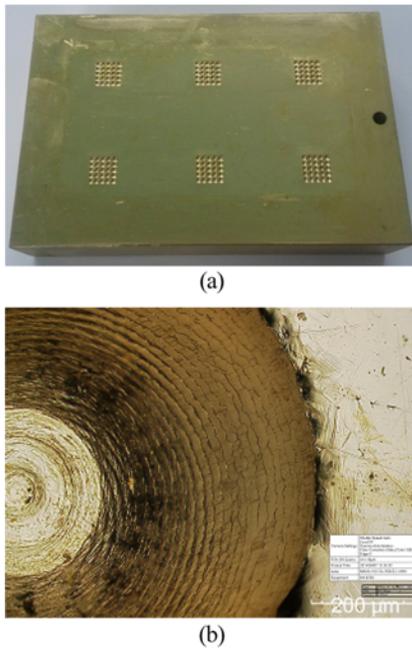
(a) The overall view of the machined metal mold and (b) the magnified view of the machined spherical lens pattern
